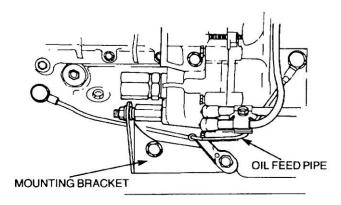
Removal of the Injection Pump Rear Mounting Bracket
